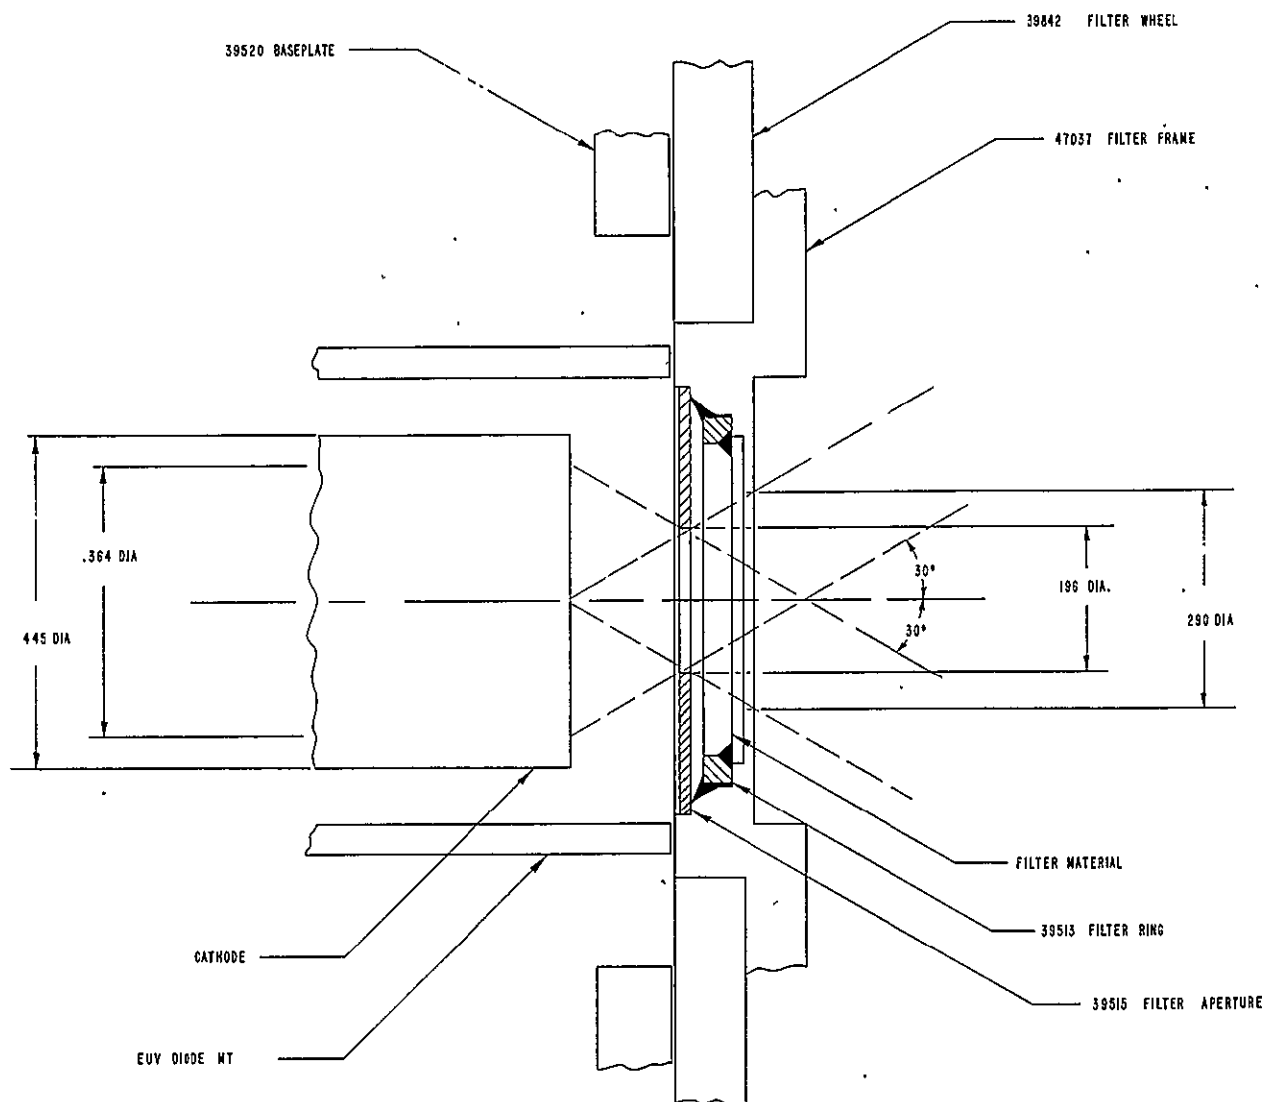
Optical Layout of Mask, Filter, and Diode Geometry for ESUM-E
